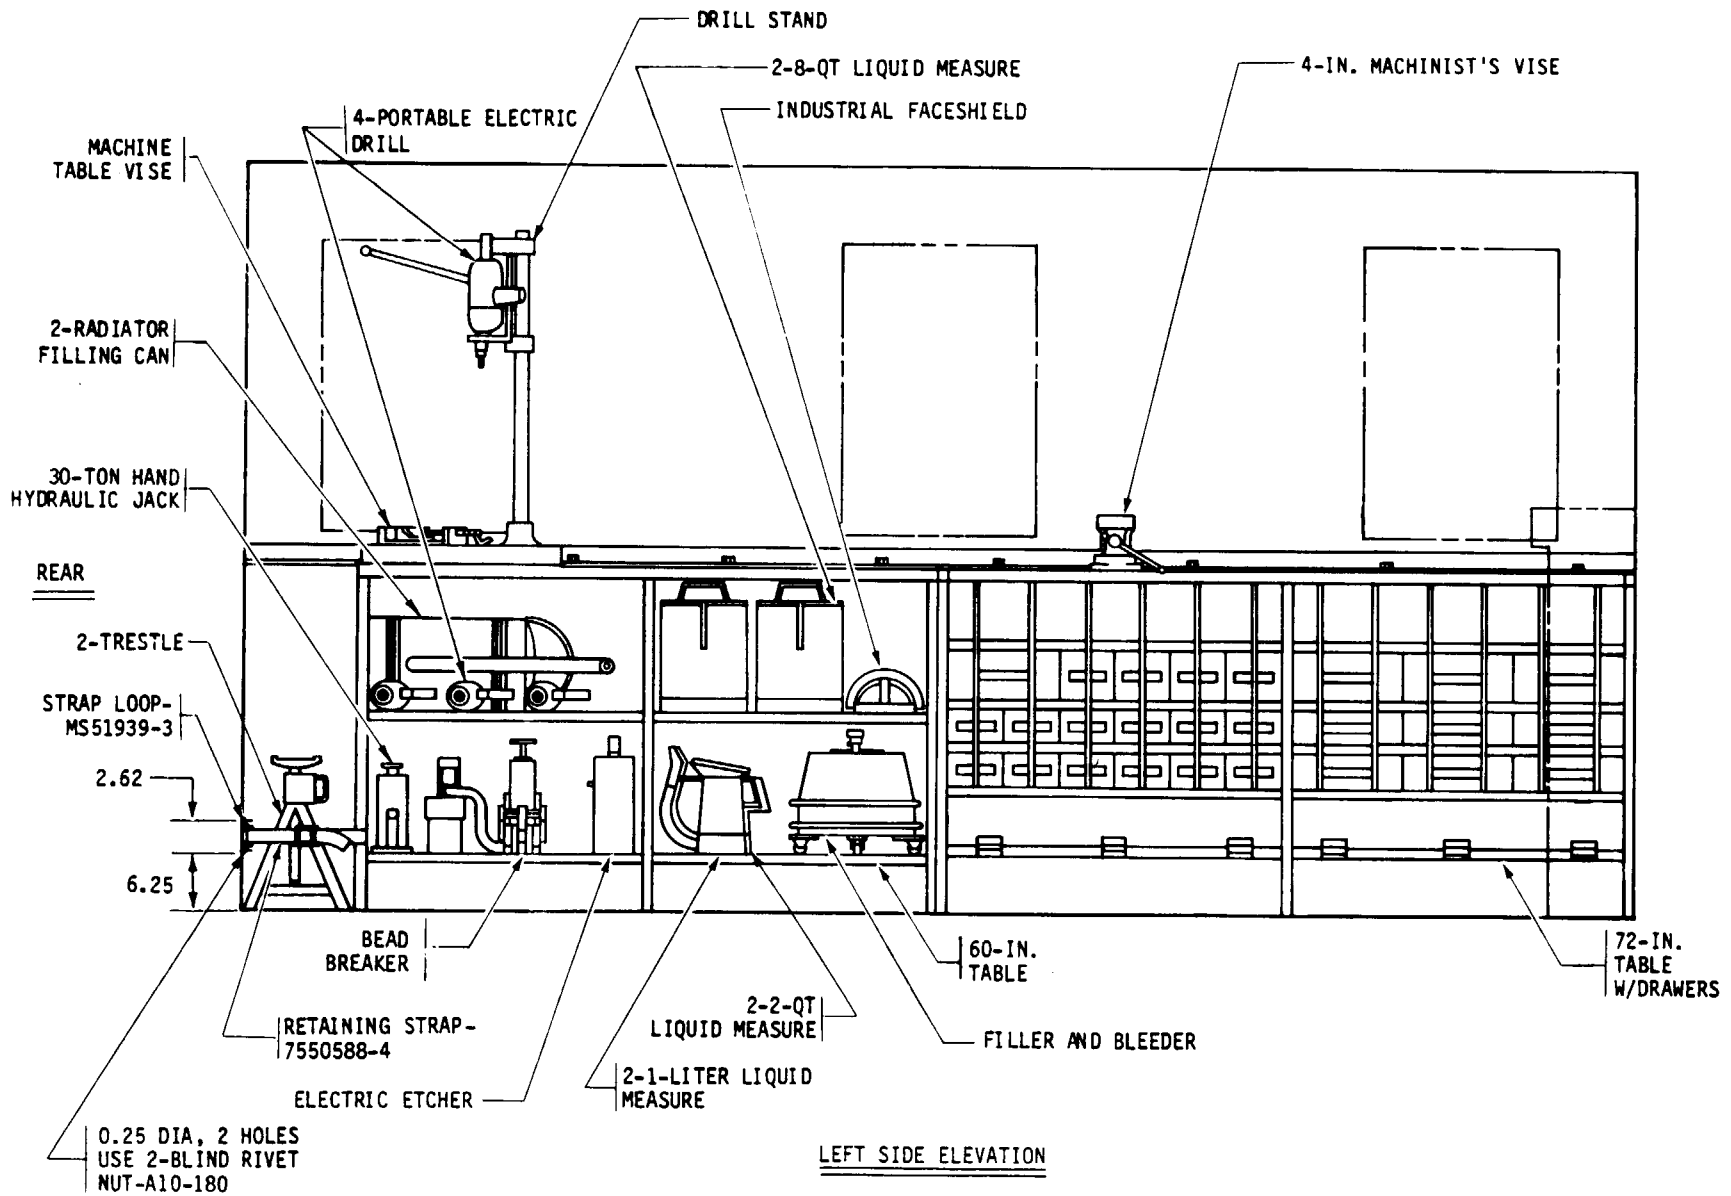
Components to be Mounted, Unit 1, M109A3, Left Side Elevation.
